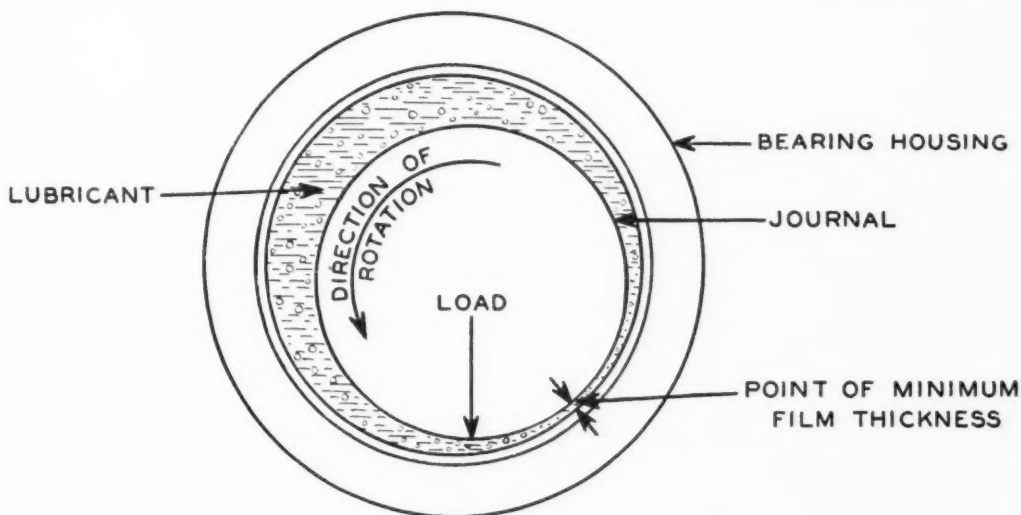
Showing the position assumed by a rotating shaft in a bearing.
